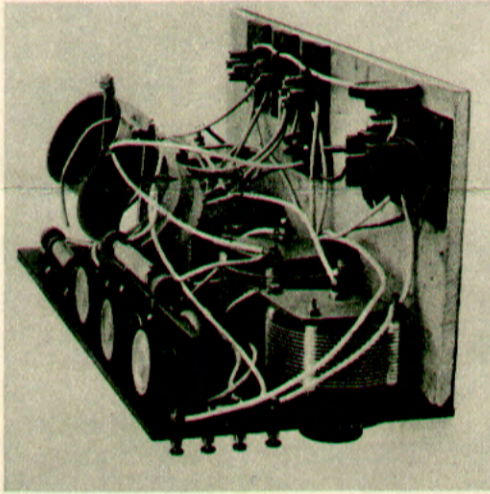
Right end view of set showing wiring and transformers set at an angle
